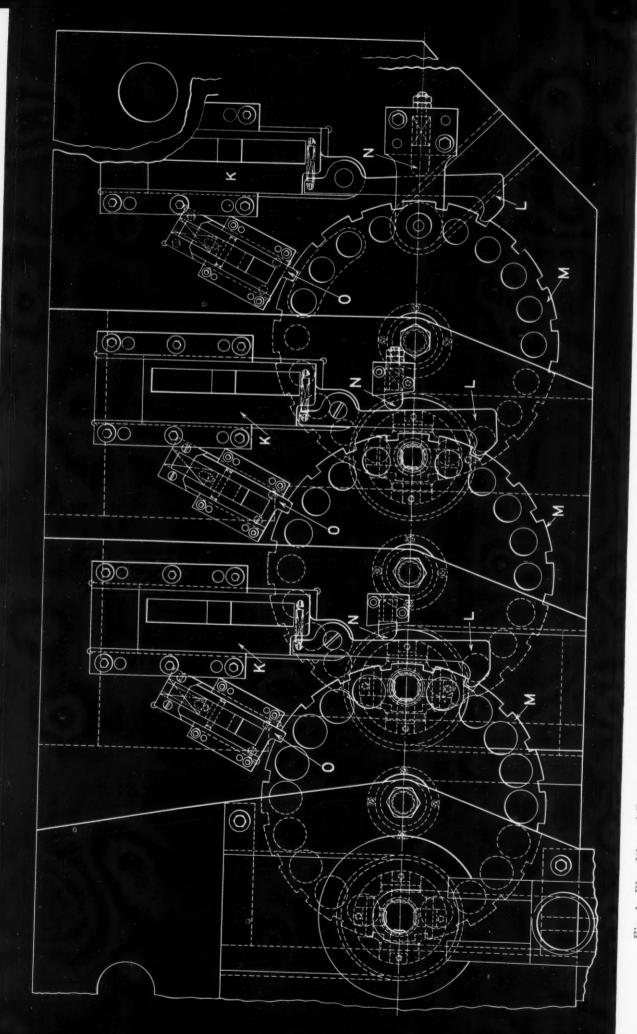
Plan View of Rotary Indexing Dials Seen in Fig. 3, Showing also Punches, Dial Indexing Mechanisms, and Dial Locking Devices
